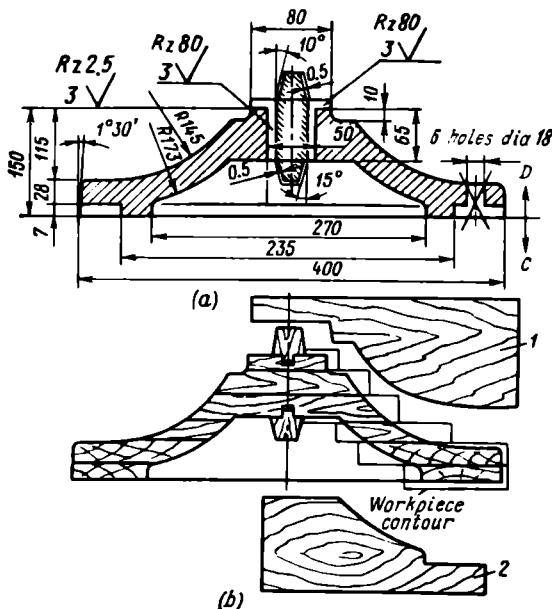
Part drawing (a) with technological designations and pattern drawing (b)
